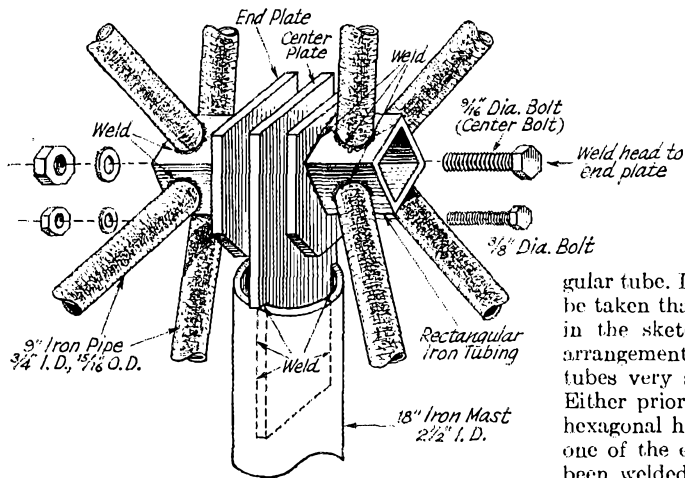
Sketch showing the heart of the Spider Quad. Once the various pipes, plates and tubes have been welded, they are cleaned and hot-dipped galvanized.
